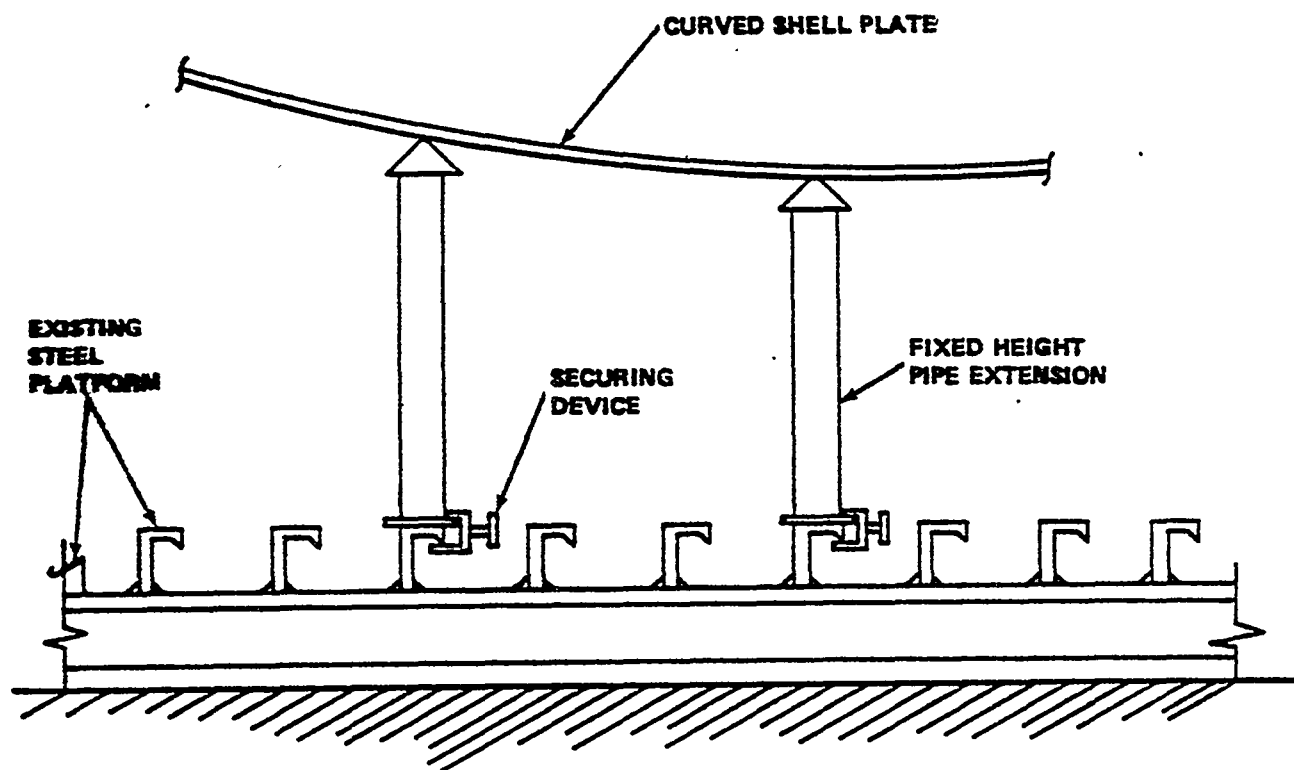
Adapting Existing Steel Platen to Curved Plate Assembly
